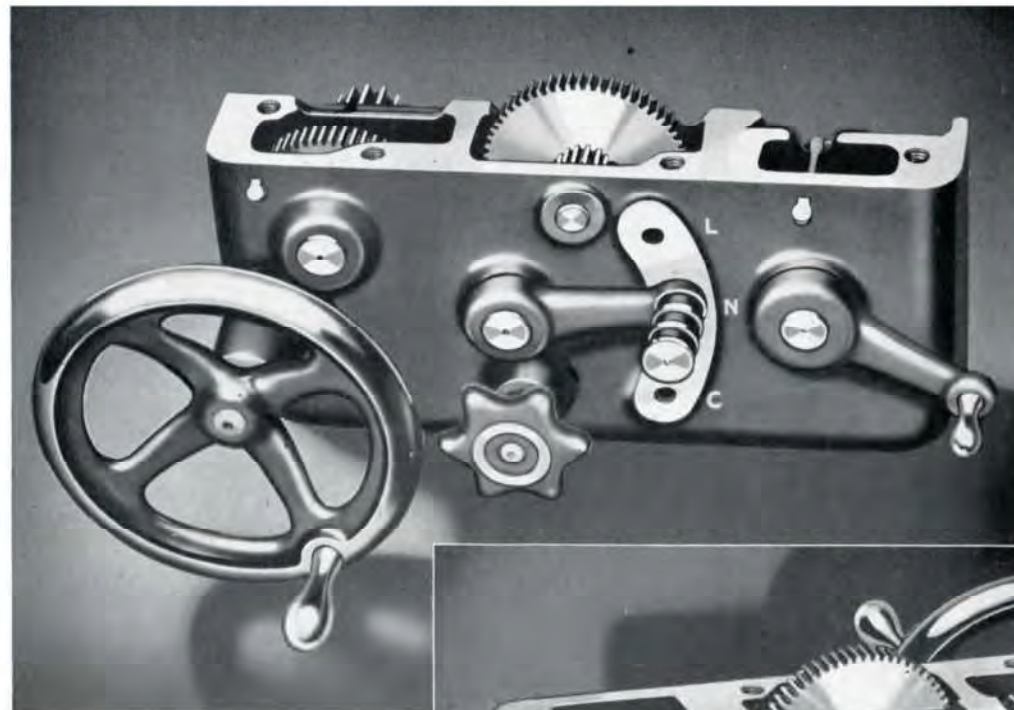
Above—Front View of Double Wall Apron Showing Rigid Box Type Construction
